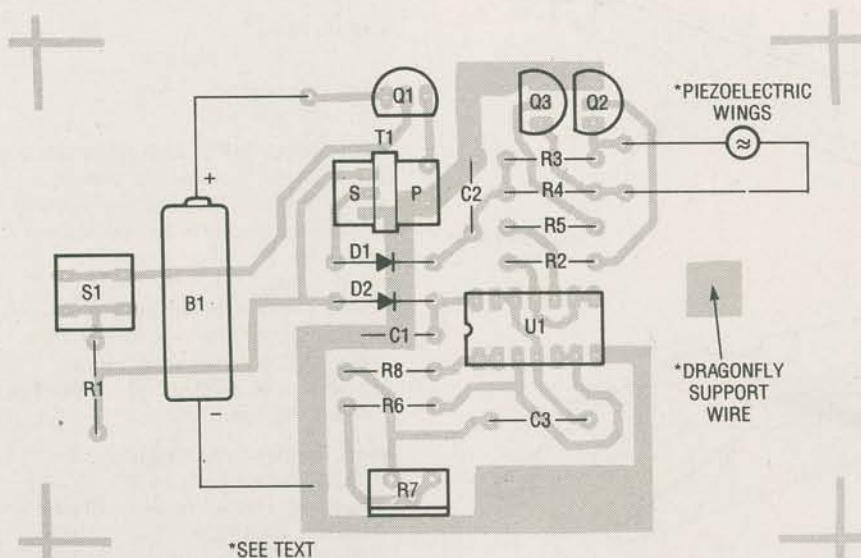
Solder the parts to the printed-circuit board as shown here. Note where the support wire solders to the board.
